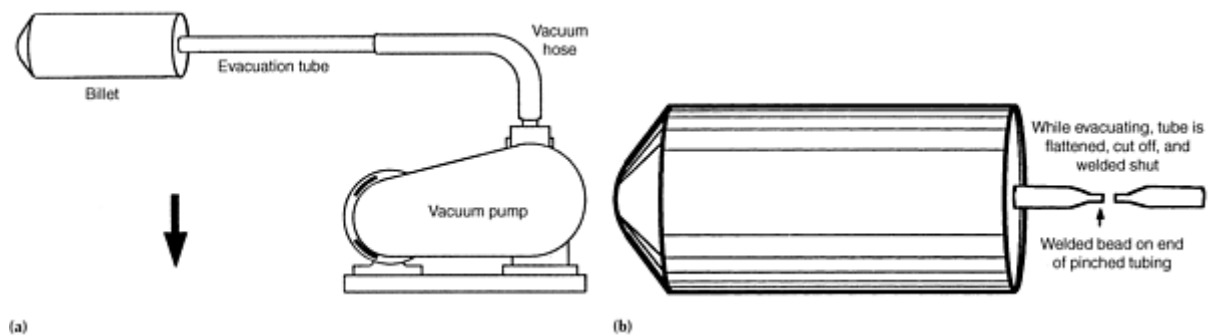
Evacuation and sealing of powder extrusion billet. (a) Billet with evacuation tube leading to vacuum pump. (b) Billet with sealed tube
